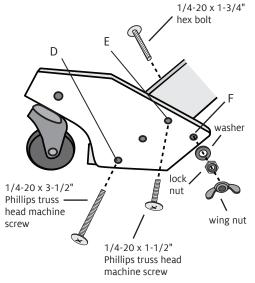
FRONT CASTER BLOCK AND INSIDE LEG
